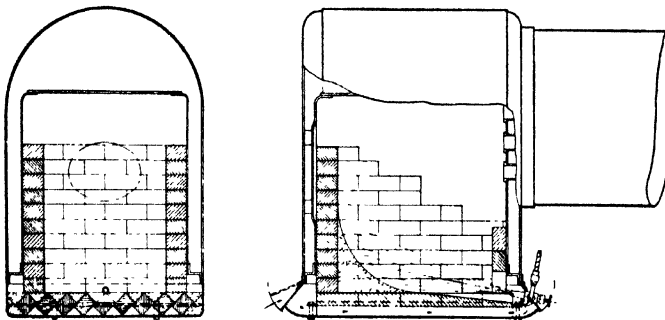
Arrangement of Brickwork in Furnace of Portable Boiler for Burning Liquid Fuel.
